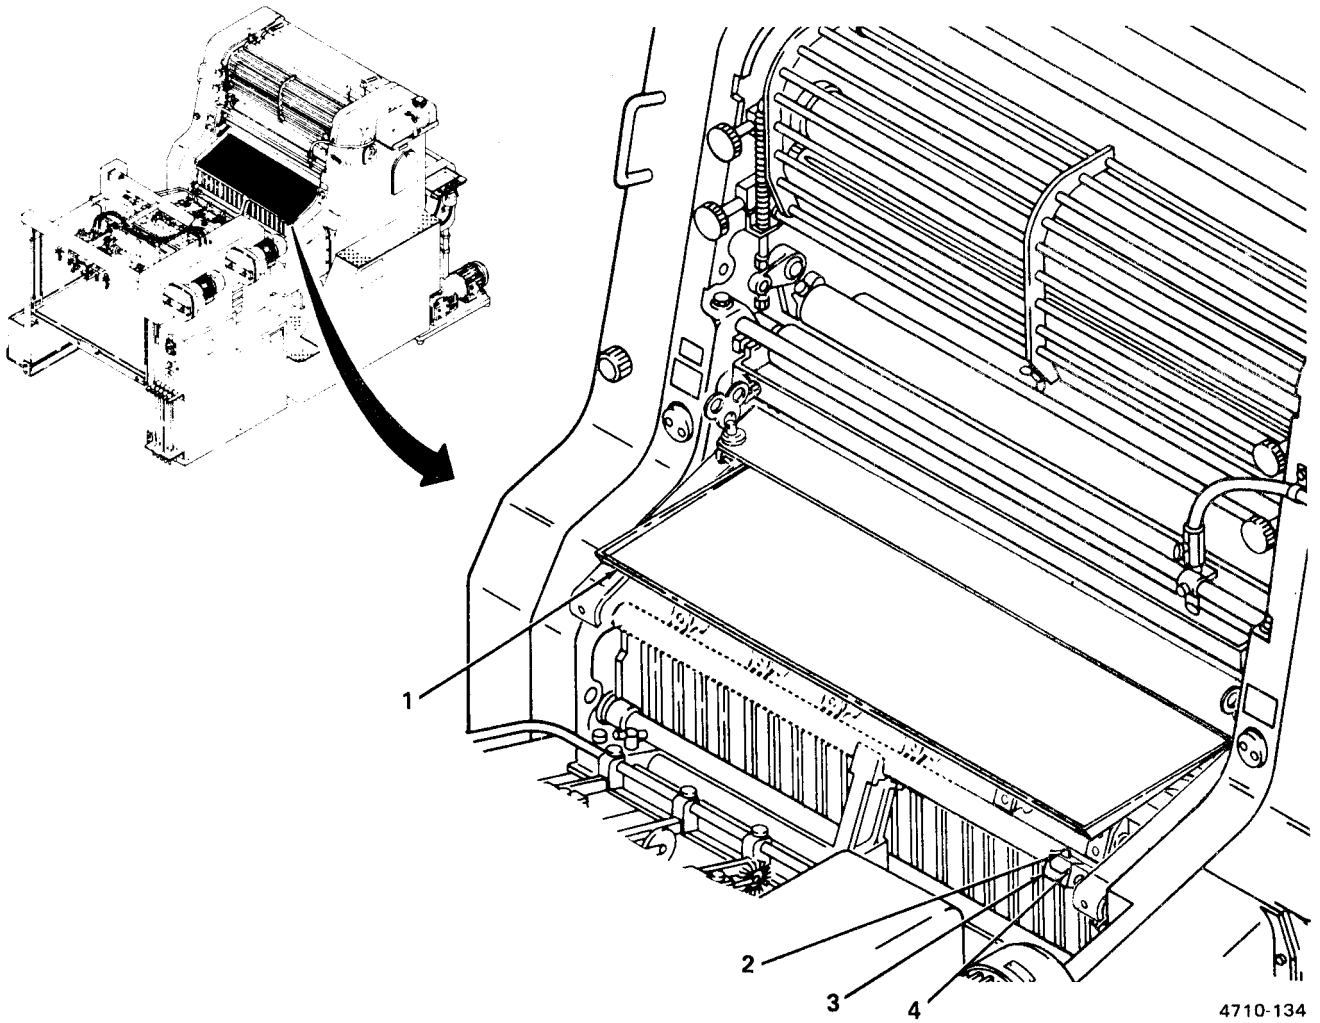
Cylinder Safety Guard Assembly Alinement.
